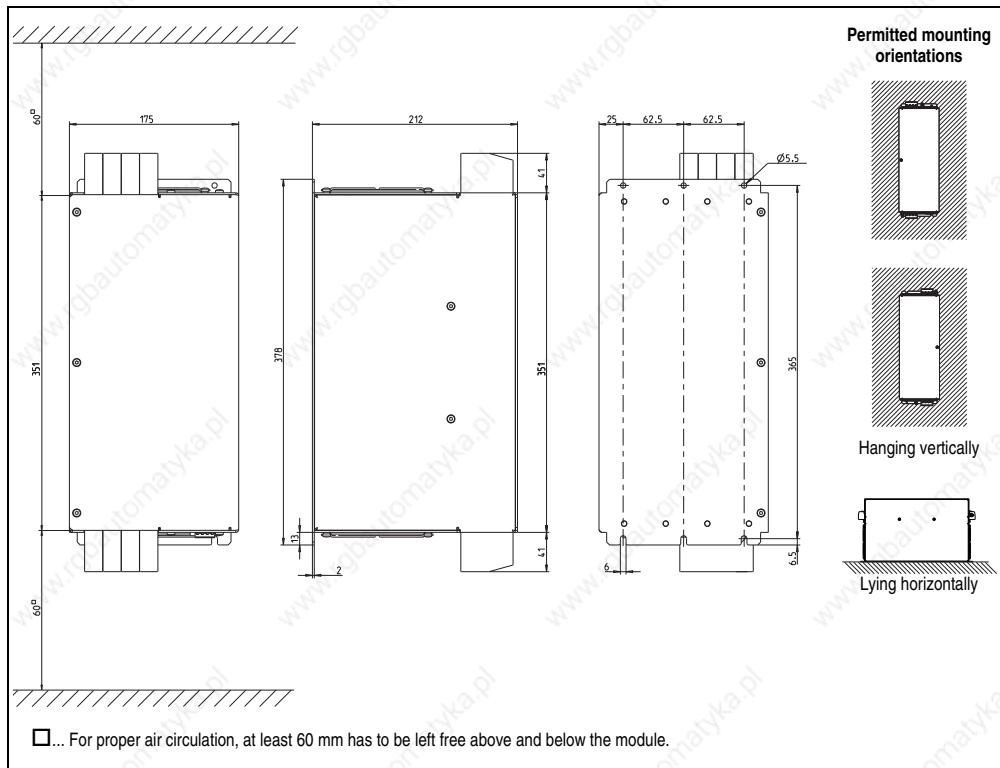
Dimensional diagram and installation dimensions for 8BVF8800H000.000-1
